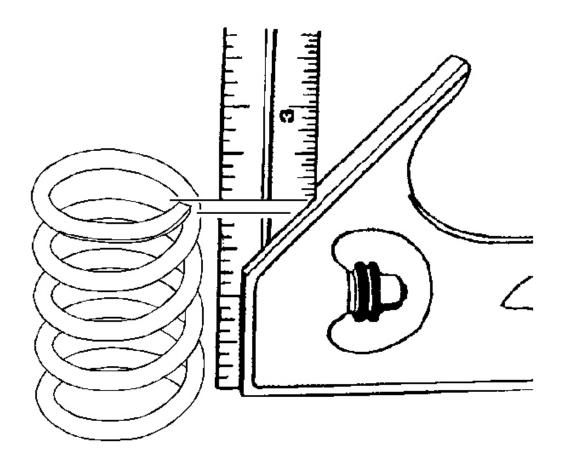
Inspecting Valve Spring For Squareness Courtesy of GENERAL MOTORS CORP.
